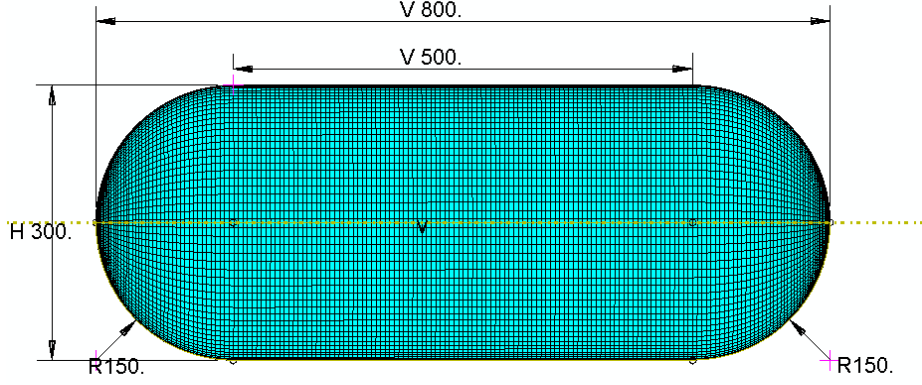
Drawing showing dimensions and finite element mesh of pressure vessel, units in mm.
